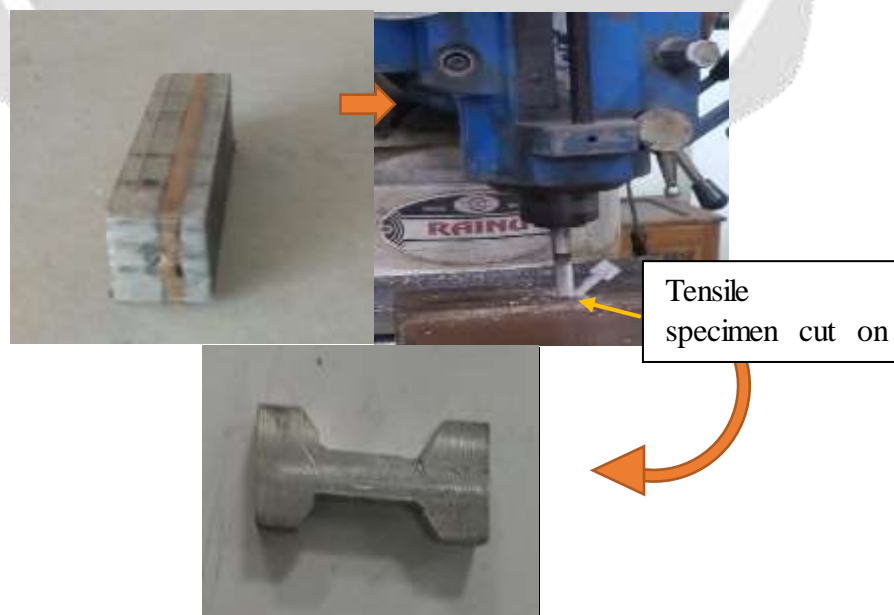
Extracted parts from the component for testing of mechanical and microstructural properties (a) Sample for making Tensile specimen (b) Development of Tensile specimen (c) Developed specimen for Tensile test
